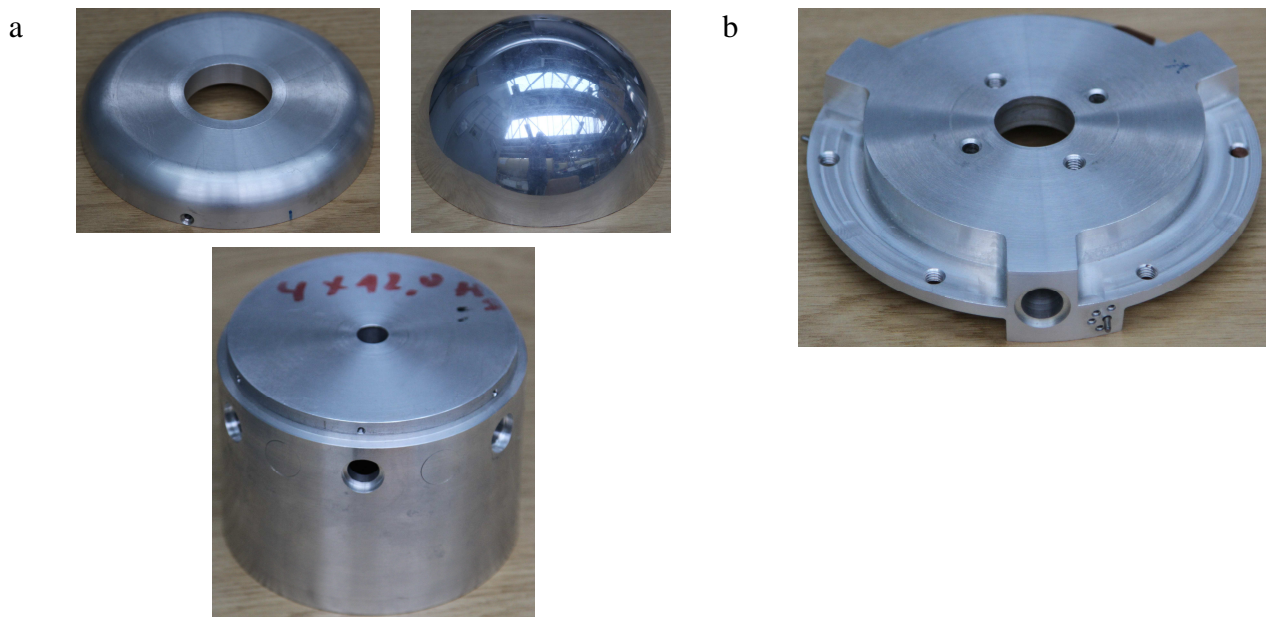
Hub types investigated; (a) Cylindrical hub with short (left) or hemispherical (right) spinner, (b) disc-type hub
